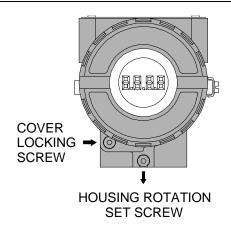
Cover Locking and Housing Rotation Set Screw
